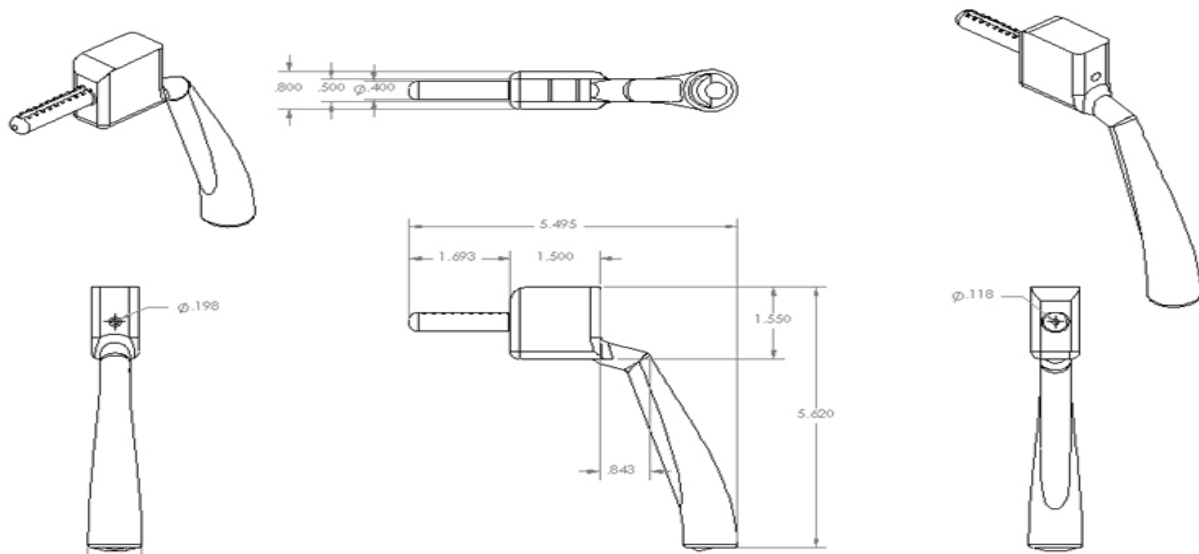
SolidWorks design with dimensions of the final device. Housing will be received on 12/9 and construction will be completed by 12/13 for testing.
